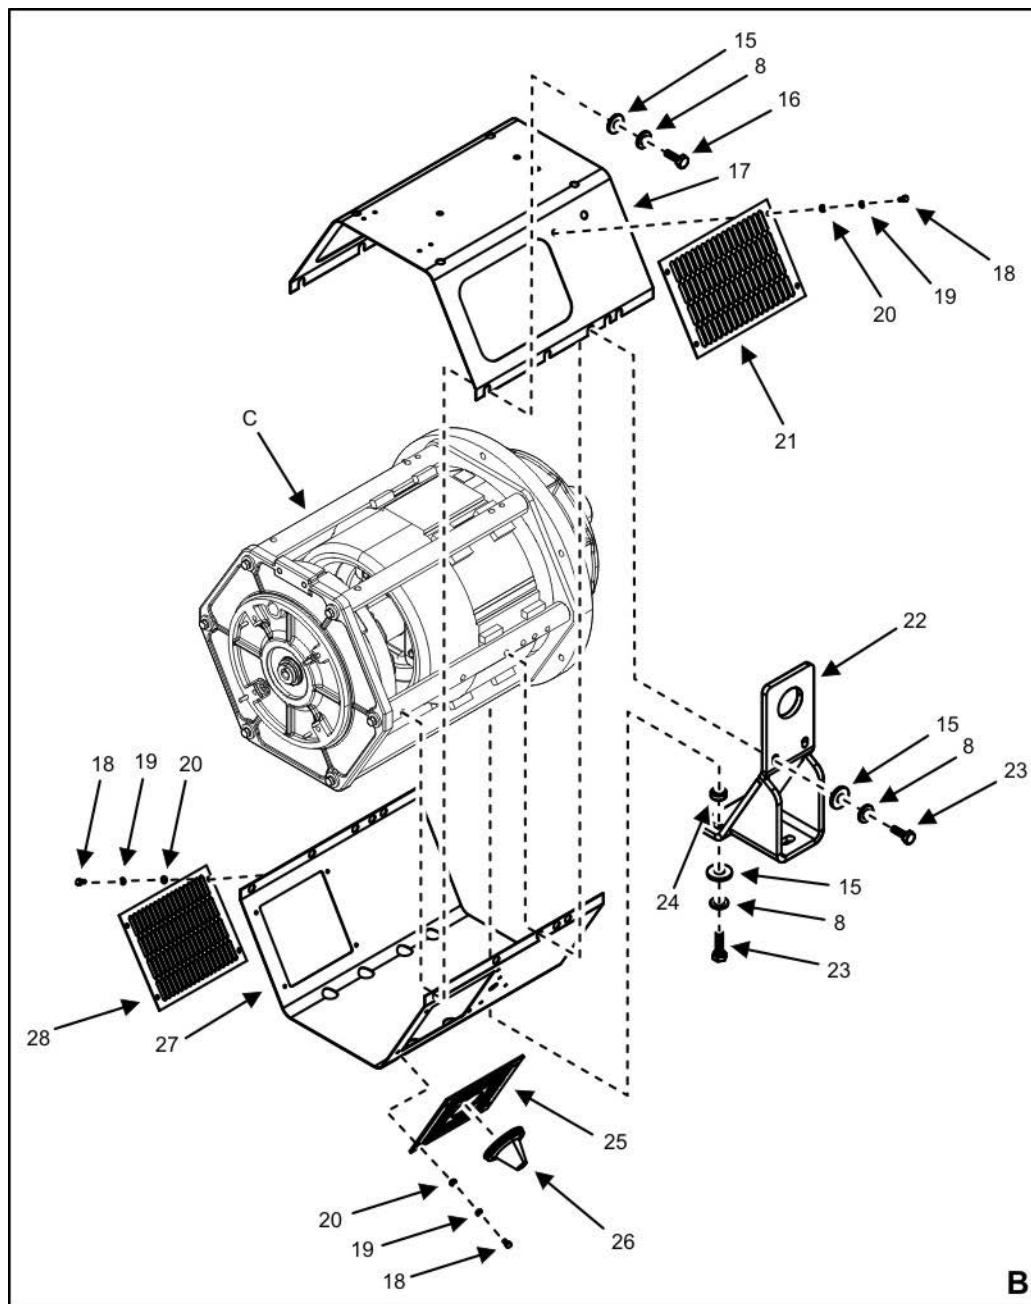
AC Generator Assembly, 50/60 Hz (Sheet 2 of 5).
